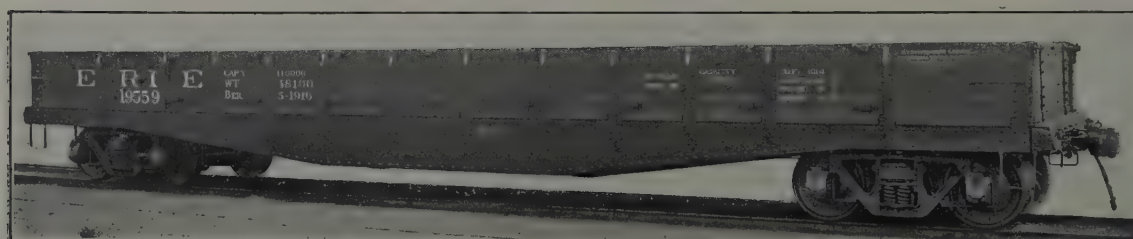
Steel Frame 55-Ton Low Side, Drop End Gondola Car. Weight, 48,100 lb.; Inside Length, 45 ft. 11  $\frac{1}{2}$  in.; Inside Width, 8 ft. 9 in.; Inside Height, 2 ft. 6  $\frac{1}{4}$  in. Builder, American Car & Foundry Company.
